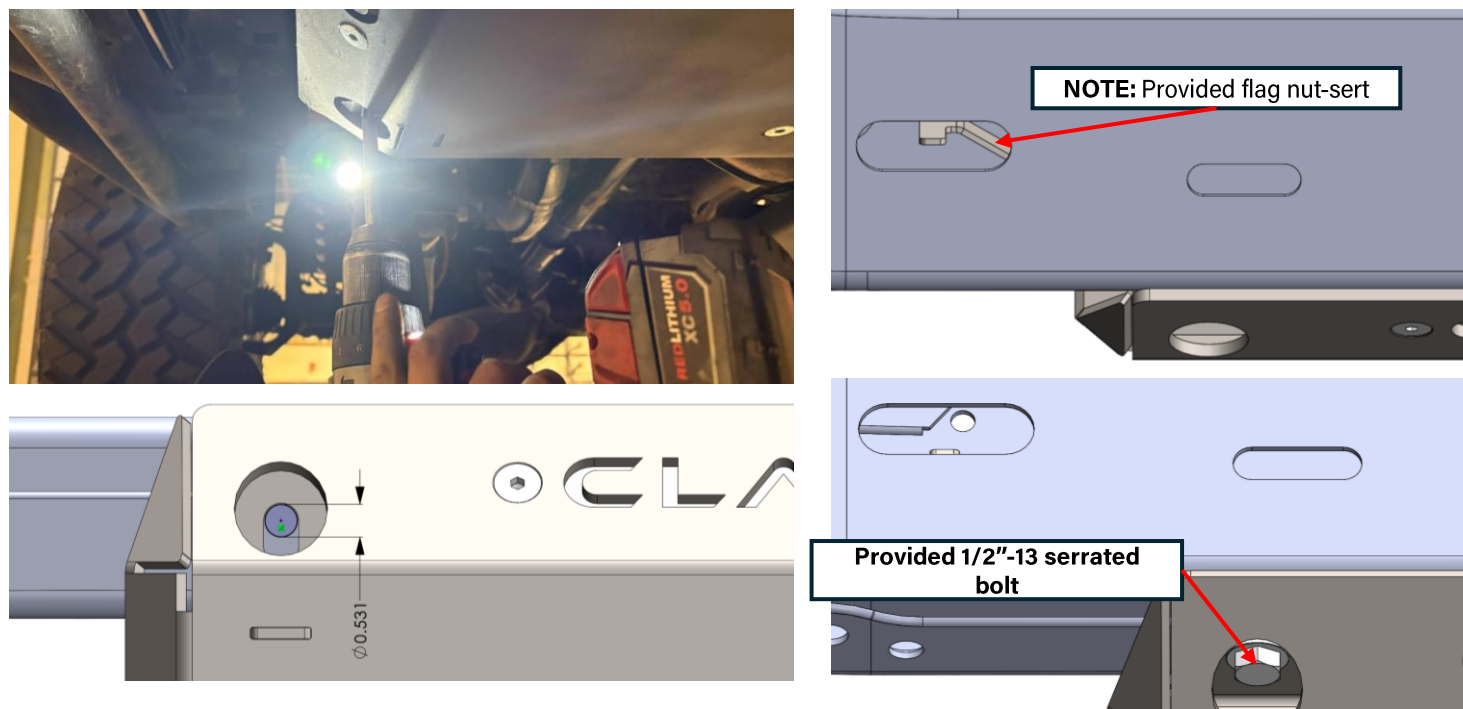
Drilling 17/32" frame rail hole for the provided 1/2"-13 serrated bolt and flagnut
